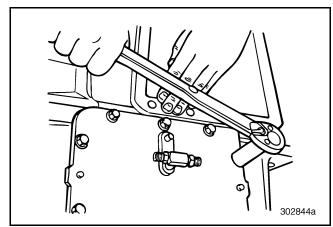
Tightening Rear Case Shift Cover Capscrews
